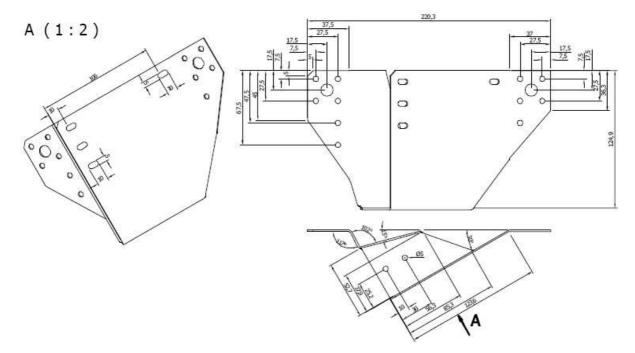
Dimensioned drawing of skewed hanger S1530G/38/1.5
